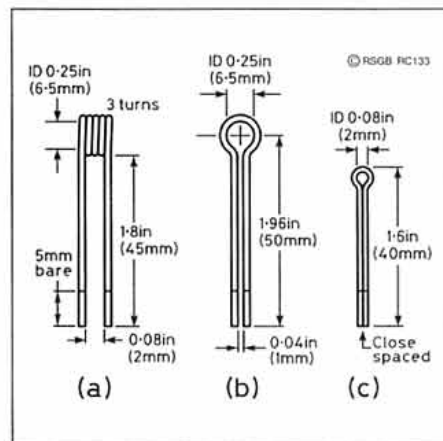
These coils are made of 1.5mm diameter enamelled copper wire and soldered to their respective heads. With an extra turn on coil (a) and a larger ID on coils (a) and (b) it should be possible to cover 45-520MHz with these three heads.
